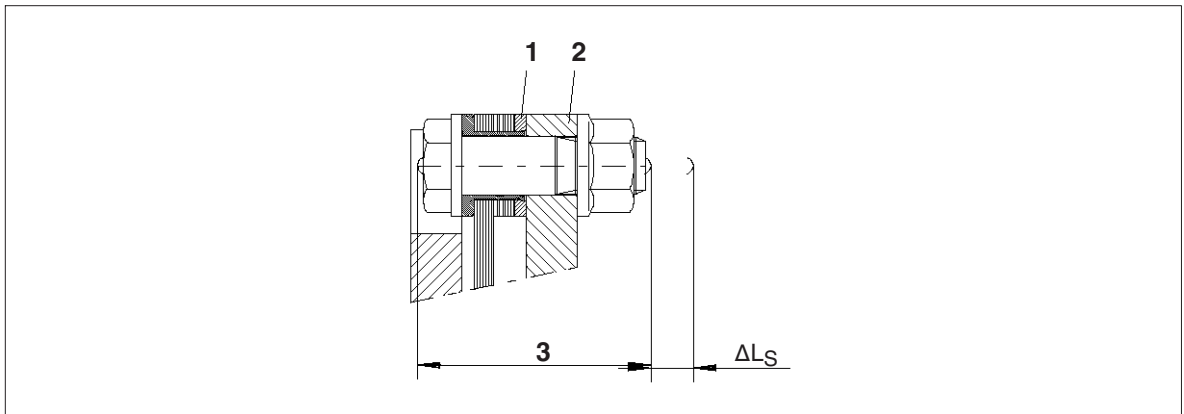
Plate pack, sizes 300 to 820 (ring plate, "Cleveloc" nut)
